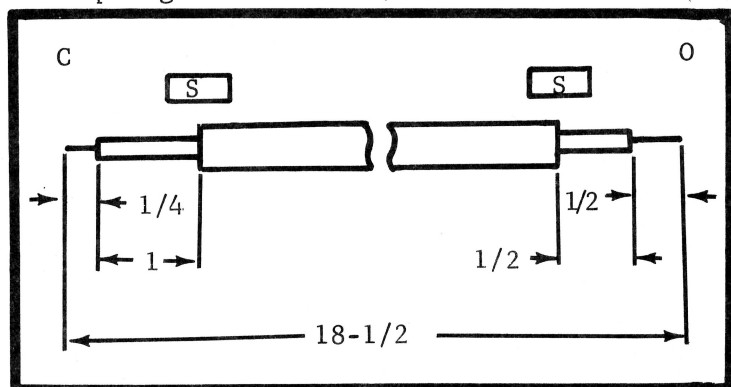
Dimensions for Cable #1 for Resistance Programing. Dimensions are in inches.
